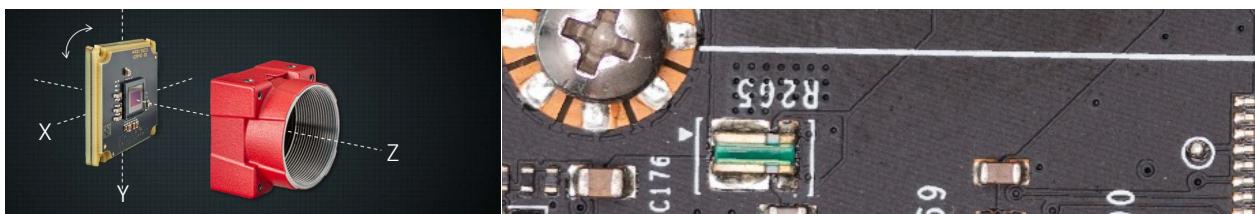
The sensor is twisted to the edge of the PCB (printed circuit board)
